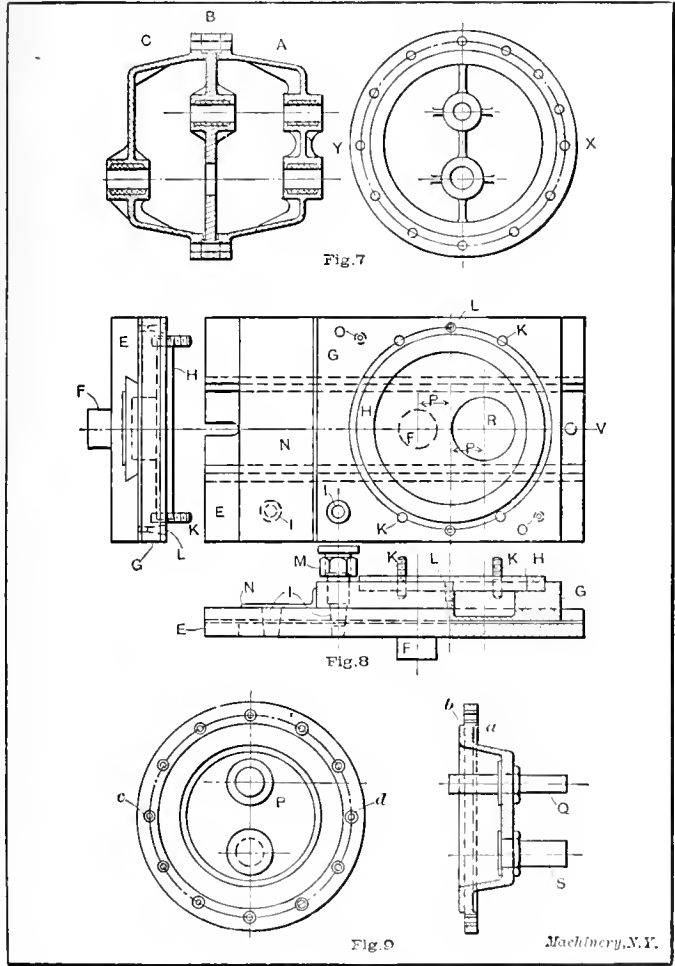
Casing with Drilled Flanges and Bored Bearings. Fig. 8. Jig in which Bearings are bored. Fig. 9. Jig in which Flanges are drilled.
